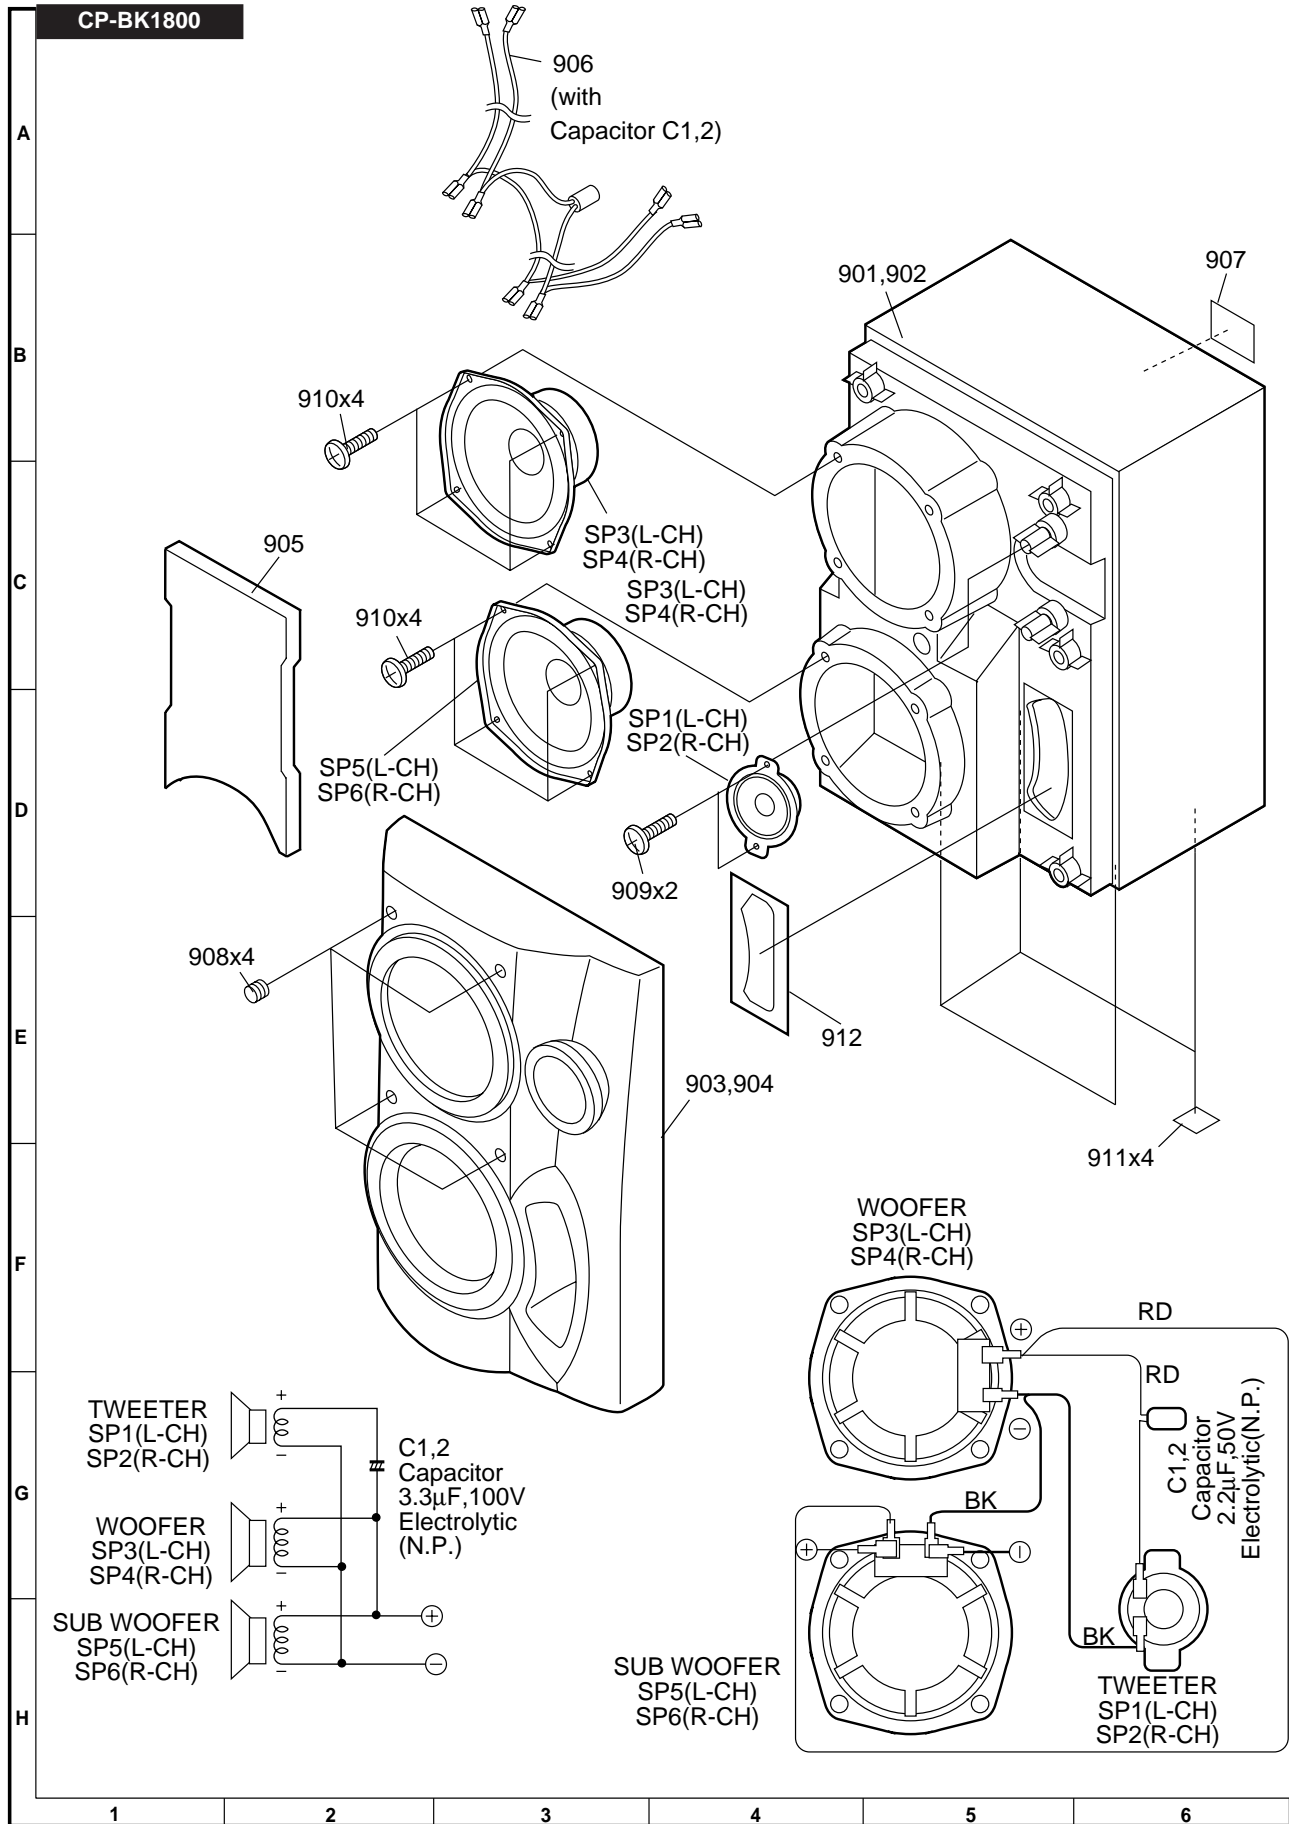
SPEAKER EXPLODED VIEW (2/3)
